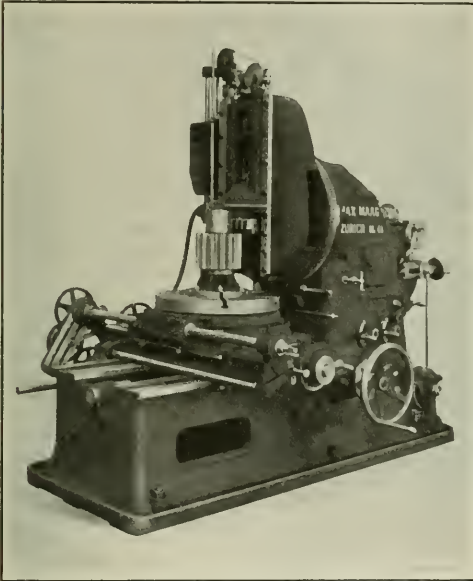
Maag Gear Generating Machine provided with a Rack Cutter that cuts on the Down Stroke
